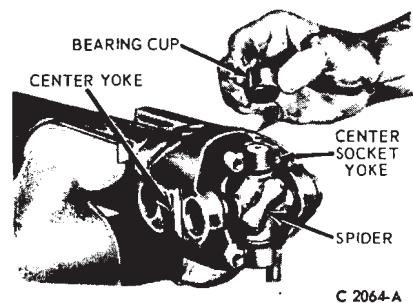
Removing Bearing Cup from Centering Yoke Socket
